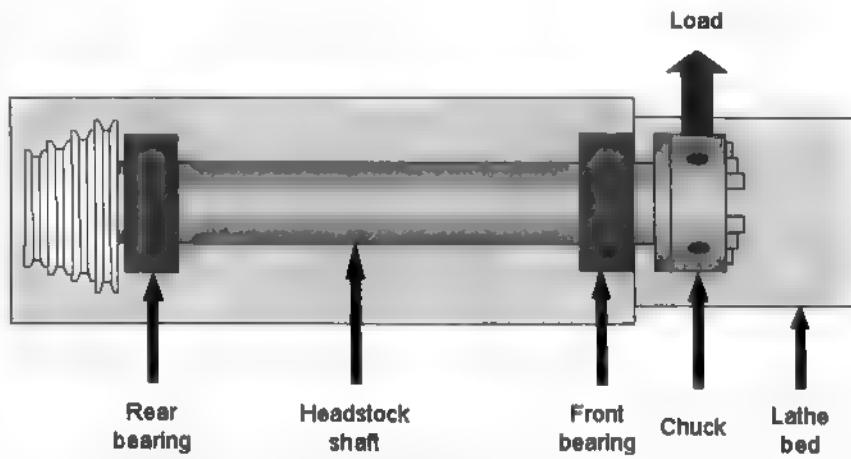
In this plan view of a lathe the side load will be caused by the cutting tool. It is therefore important that the front bearing is as close as possible to the load.
